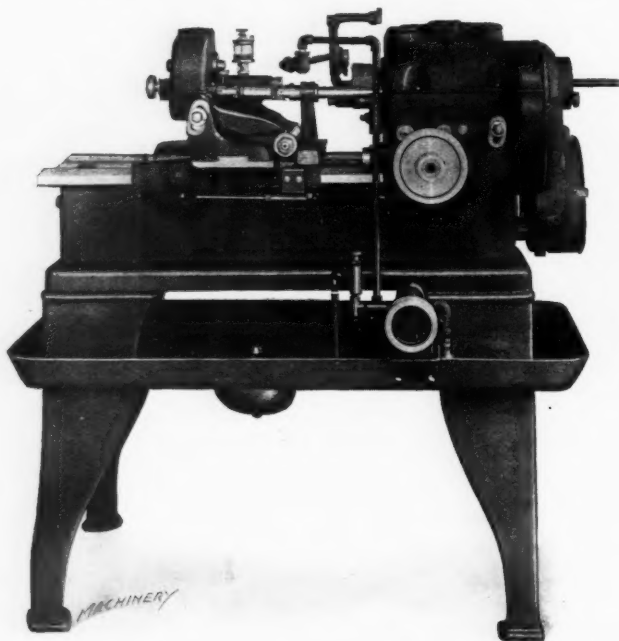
External Thread Milling Machine for threading Rifle Barrels
